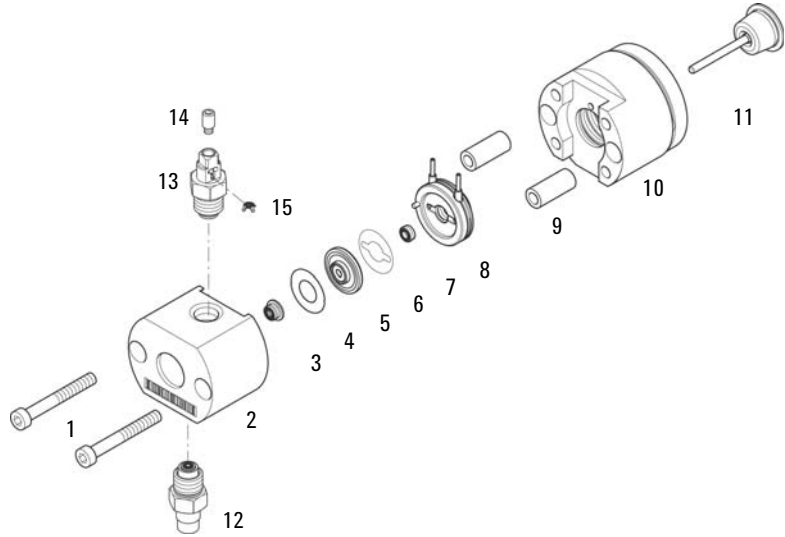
Primary pump head (Quaternary Pump) without seal wash
